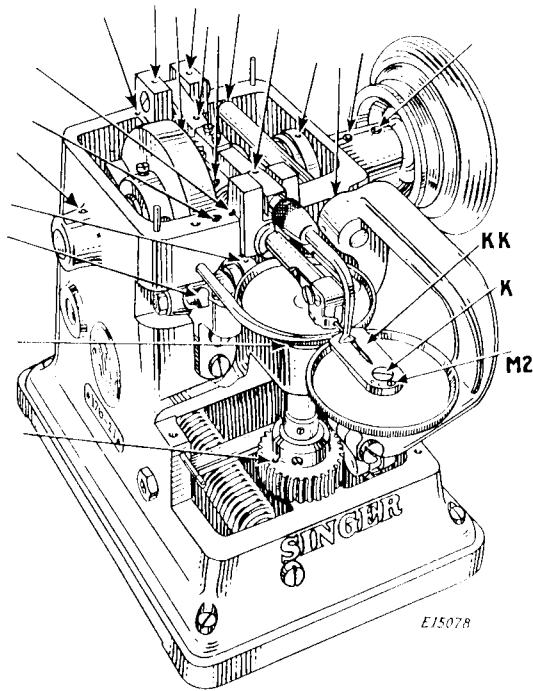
Oiling Points at Front, Top and Left (Machines 176-21 and 176-22)
